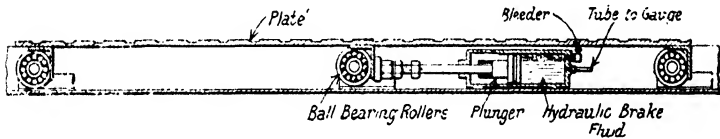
IN THE BEAN BRAKE TESTER EACH CAR WHEEL RESTS UPON A PLATE OF THE KIND SHOWN IN SECTION IN THIS DRAWING
